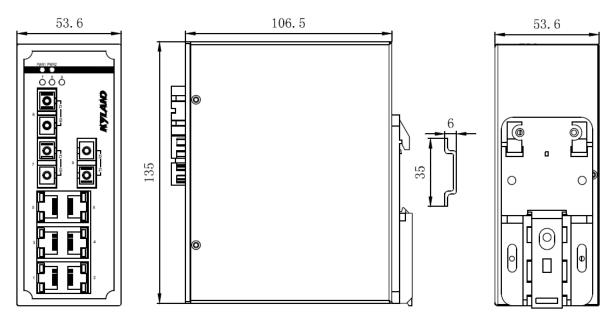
Dimensions for DIN-Rail Mounting (unit: mm)
